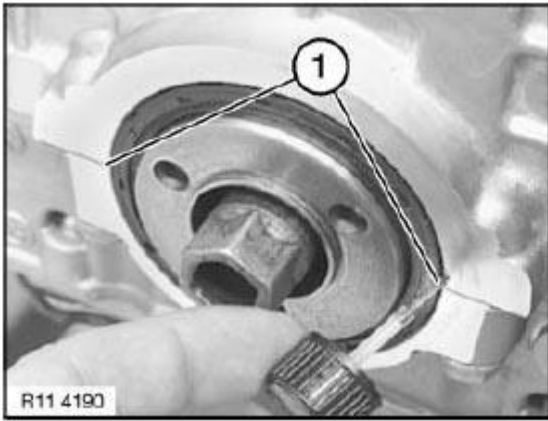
Coating Surface Of Sealing Compound In Both Grooves With Loctite Primer, Manufacturer Number 171000
